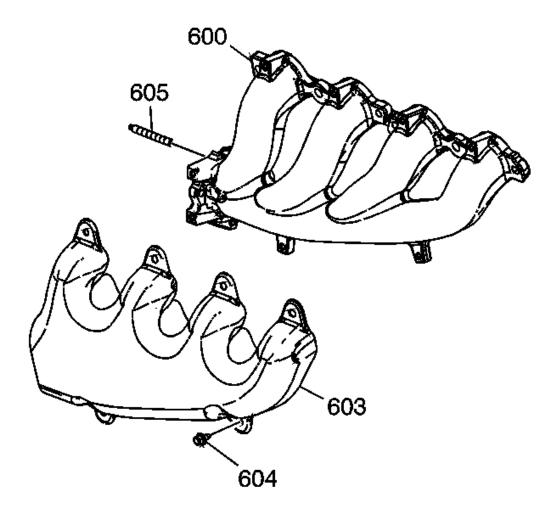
Heat Shield & Bolts Courtesy of GENERAL MOTORS CORP.
